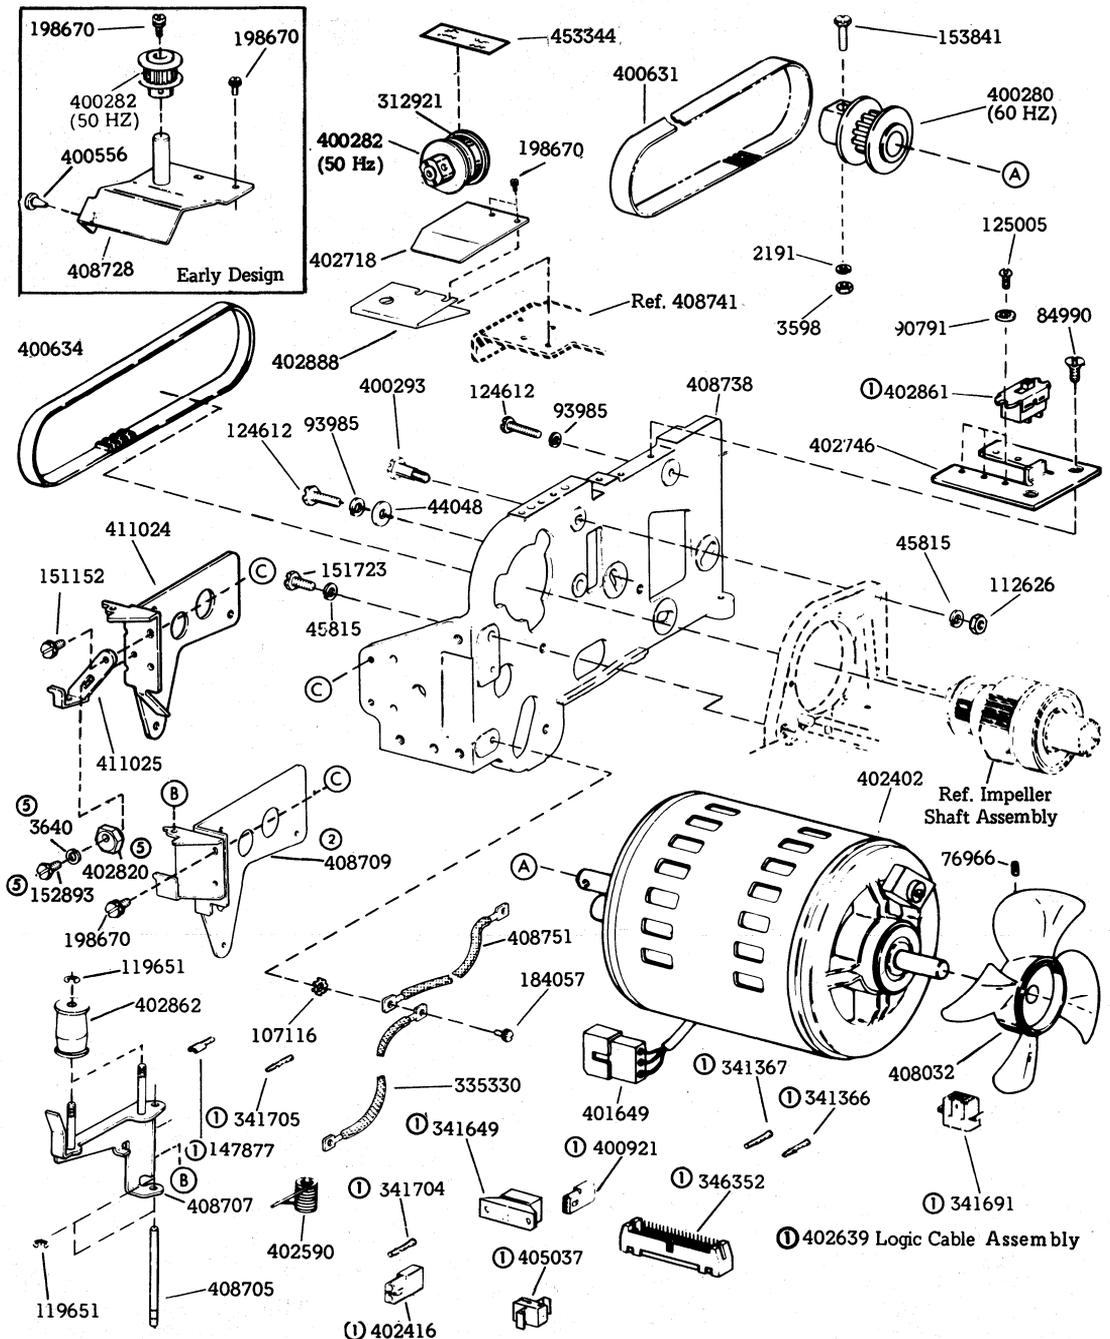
Left Casting Assembly and 402402 Motor (Forms Access - Tractor Feed)
